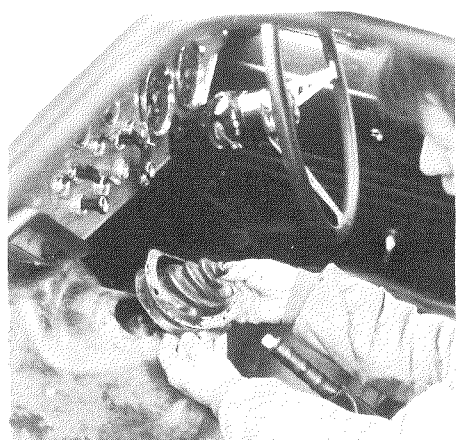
finally followed by the gearlever rubber gaiter. This isn't essential but it makes things a little easier.
